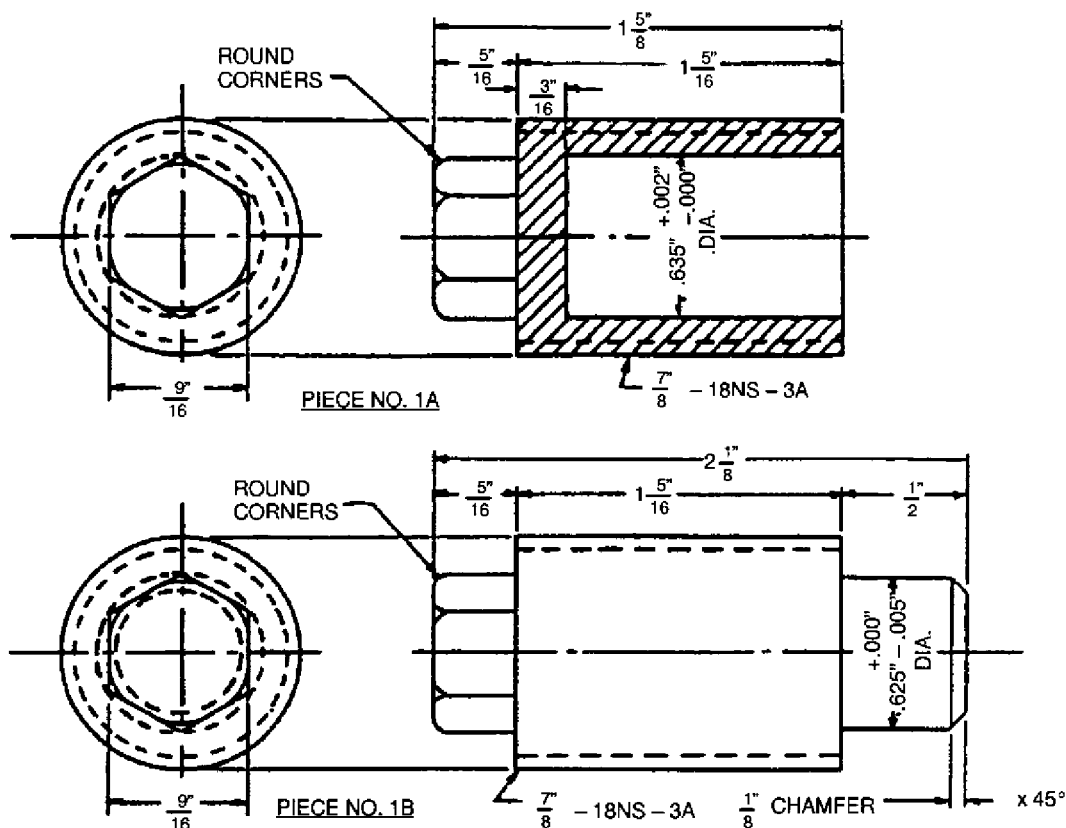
Plugging Packed Tube Ends (Sheet 1 of 2)
